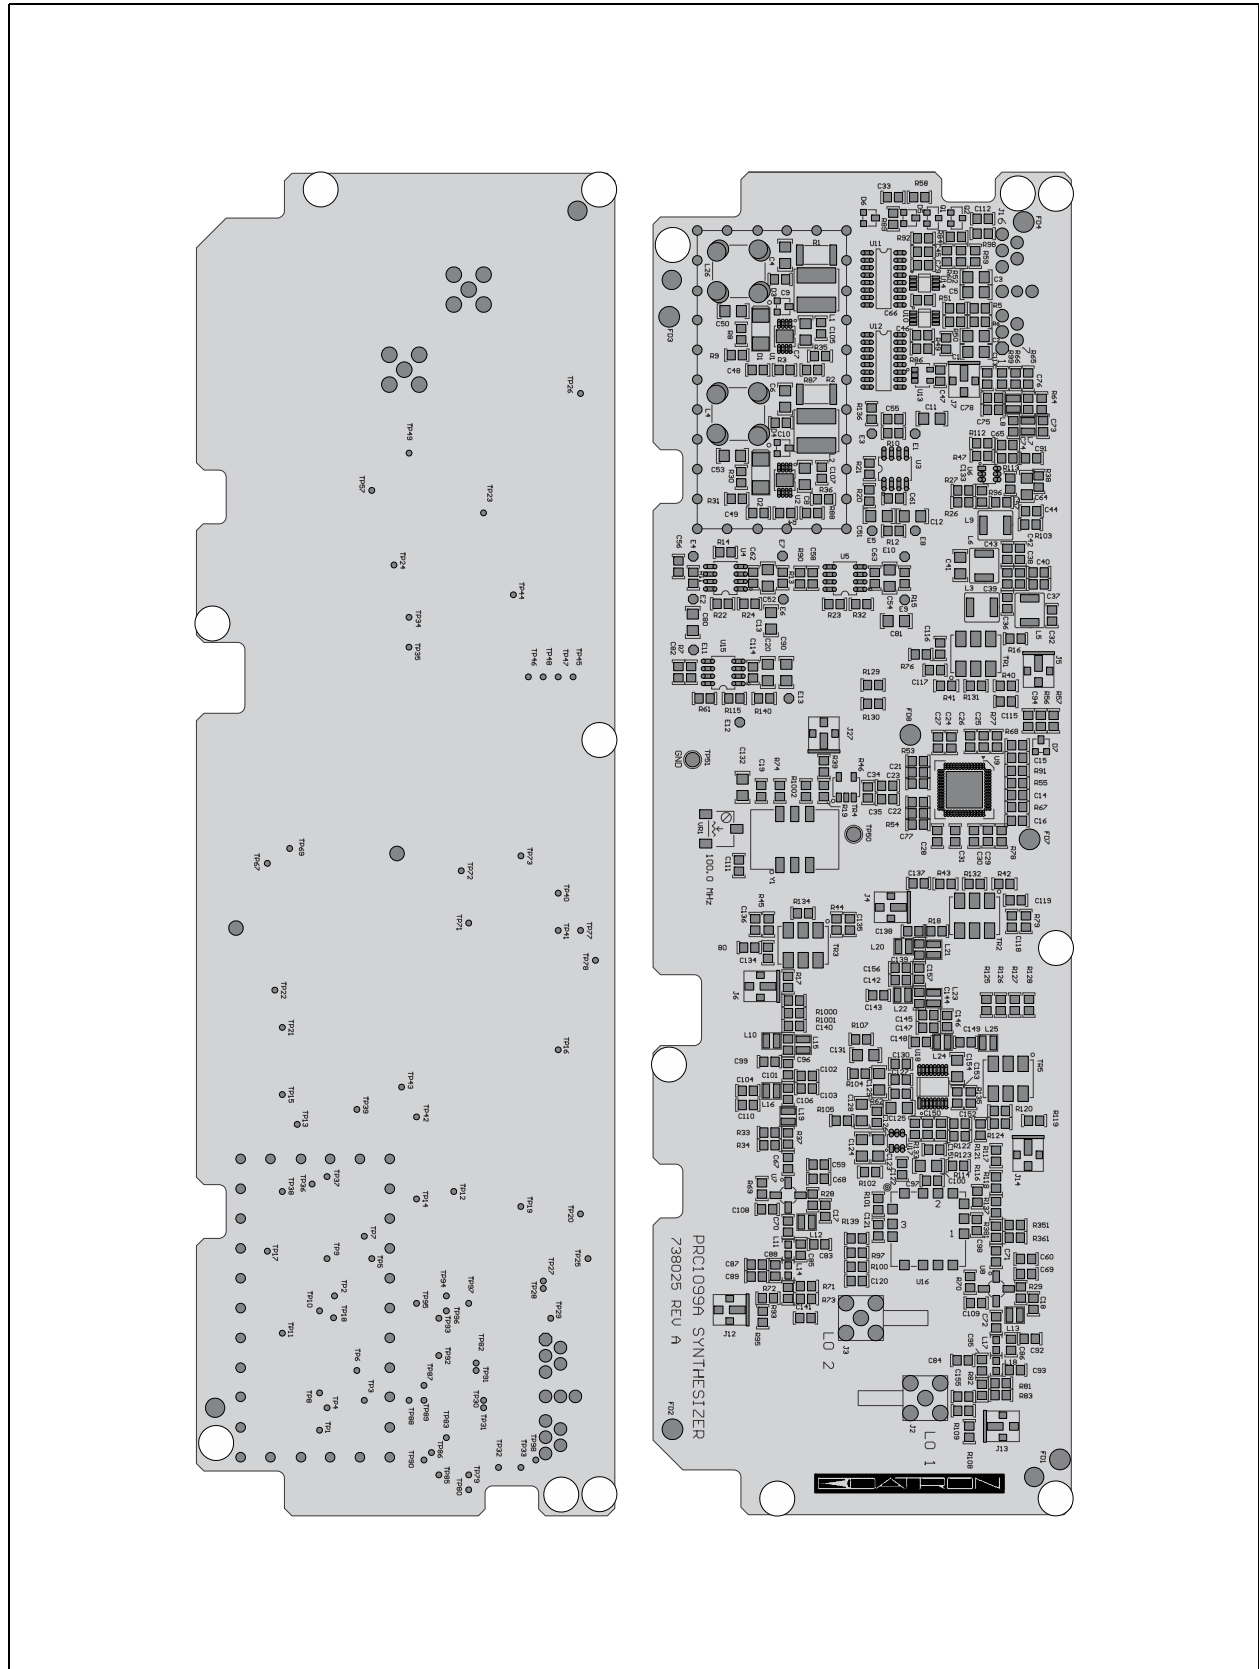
Synthesizer Board Component Locations (738025 Rev. A)
